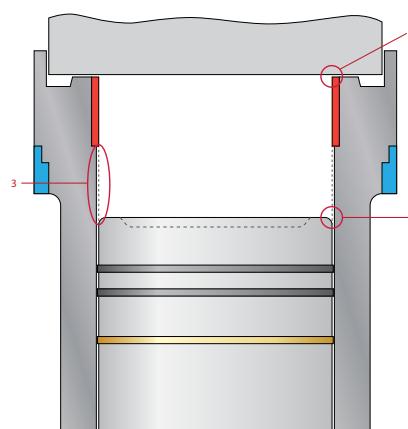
Drawing of a cylinder of an Otto engine indicating the spots where combustion may not be optimal.
